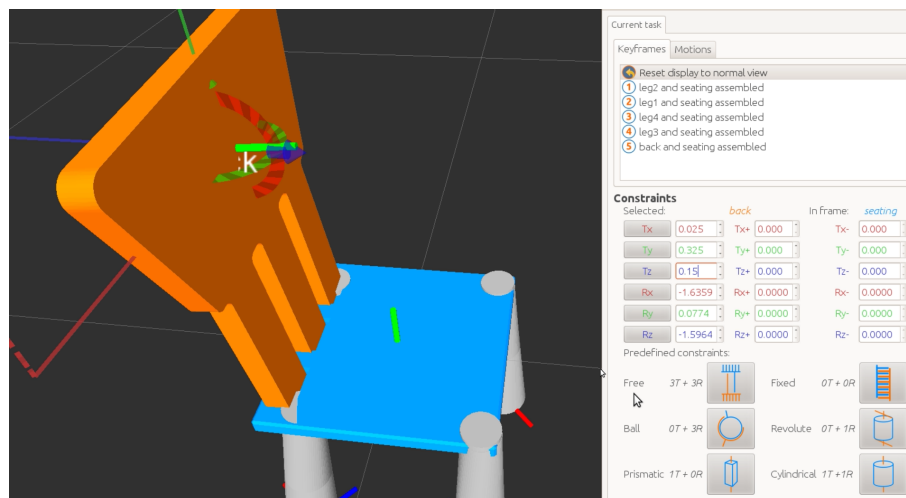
Detailed view of the GUI showing the learned constraints and assembly plan
